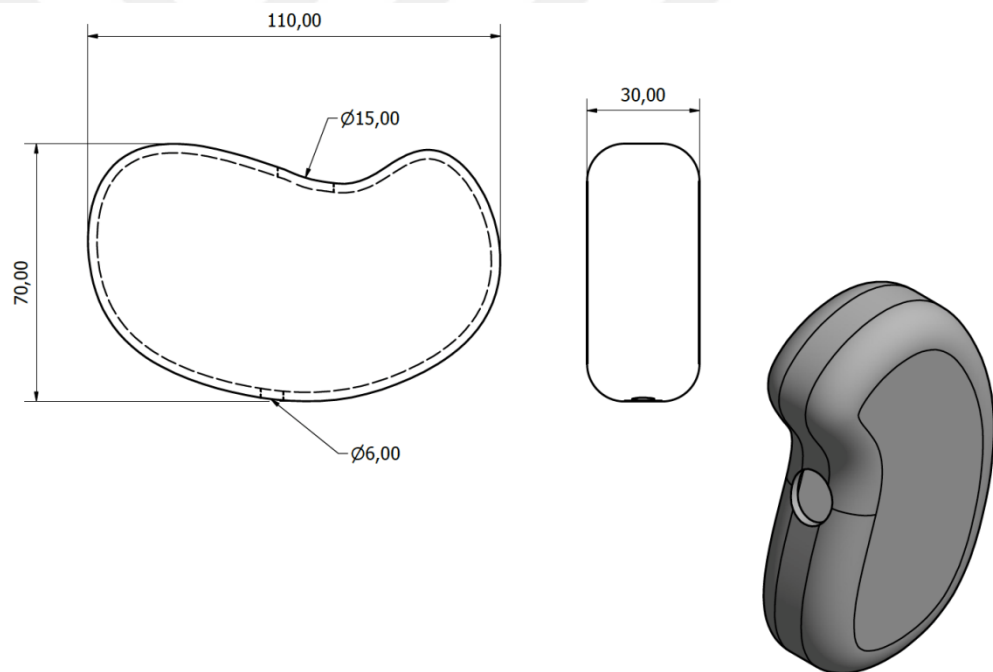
10 The mechanical drawing of kidney for 3D Printer
